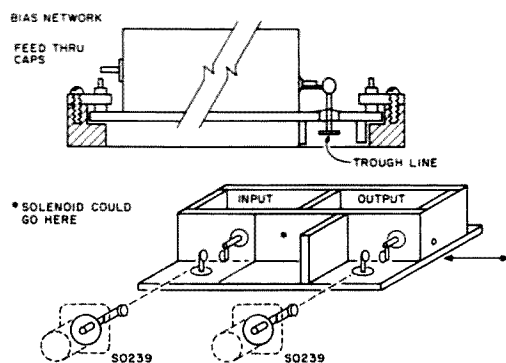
The approximate method of fabricating the double-sided printed circuit board base and shielding of the preamp. The shields are covered with copper foil "lids" that are soldered to the edges of the shield enclosures. The drawing also shows the mechanical details of the switching contacts.
